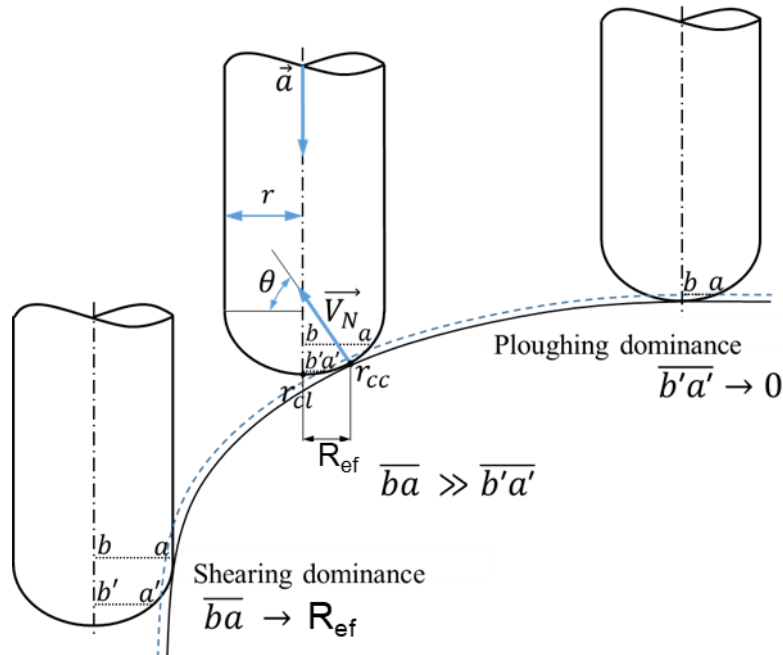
Changes in the tool-workpiece contact at different instants during free-form milling.
